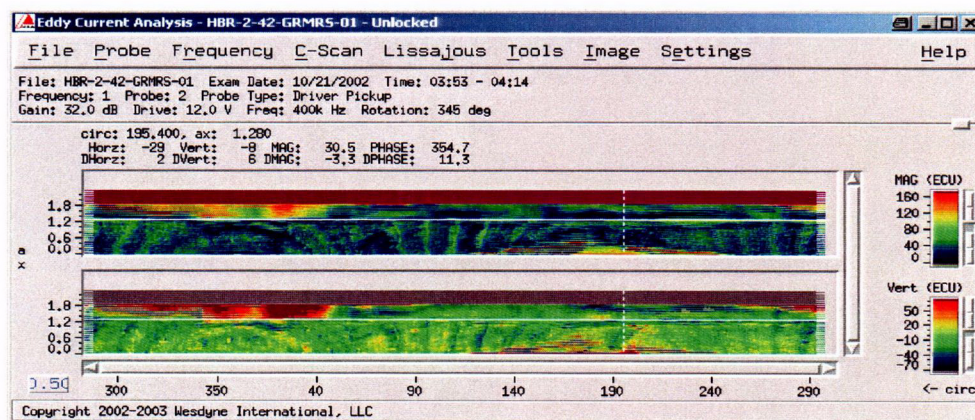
H.B. Robinson Penetration No.42 J-weld Examination Coverage on Cladded Surface
